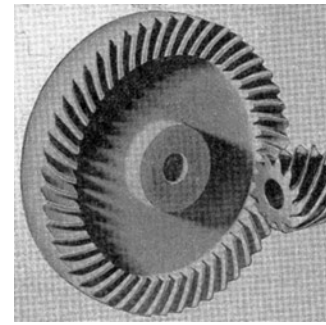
Helicon gearset. (Courtesy of Spiroid Division, Illinois Tool Works, Chicago, Illinois.)
